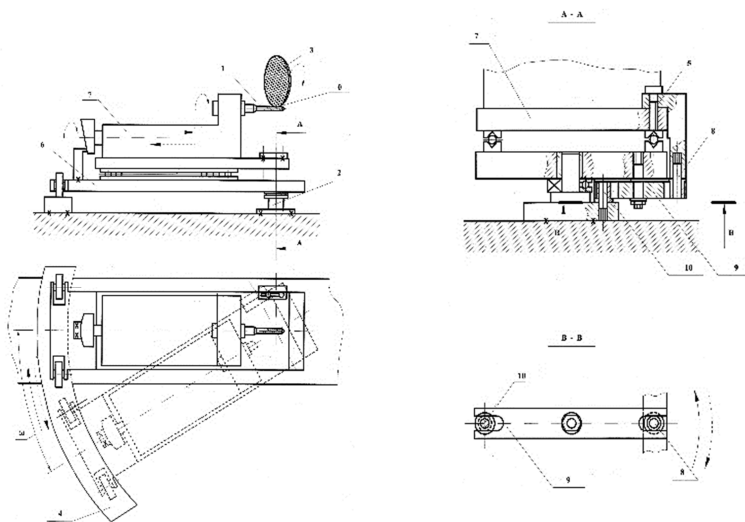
Schematic diagram of the rotation axis of the drill mechanism workpiece relative to the plane of the grinding wheel at Grinding of helical grooves with a variable tilt angle.
